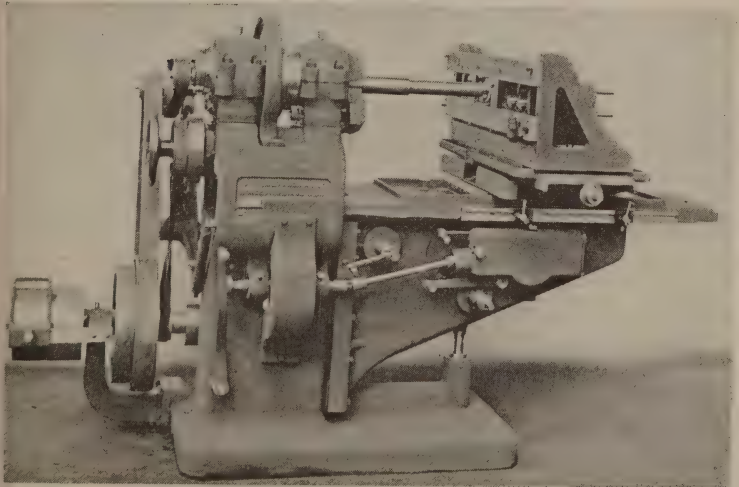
Cylinder grinding machine. (*Courtesy of The Heald Machine Company.*)
